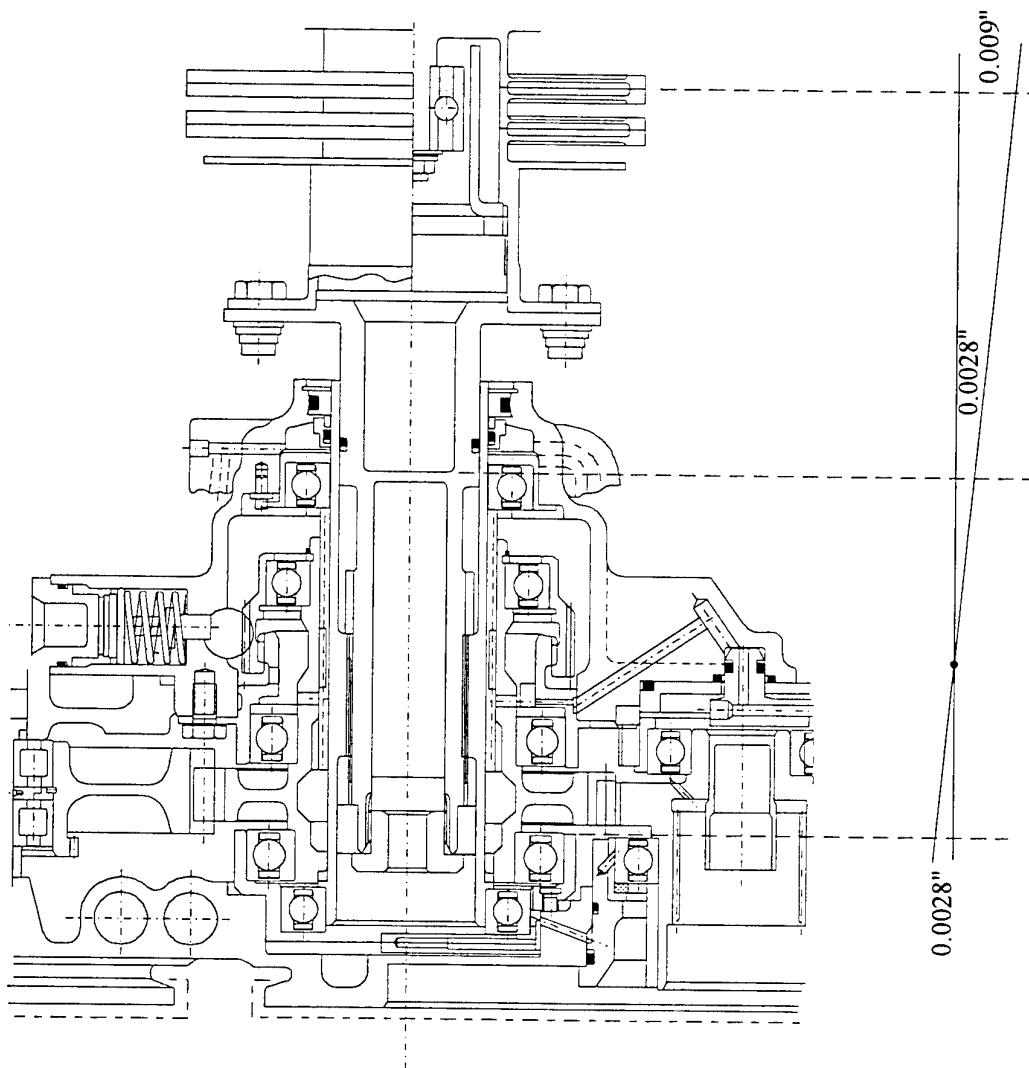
Clearance of 19E215 shaft due to transverse displacement and angular misalignment
